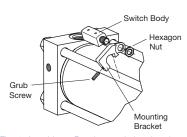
Attaching a Read.me switch to bracket and tie rod
